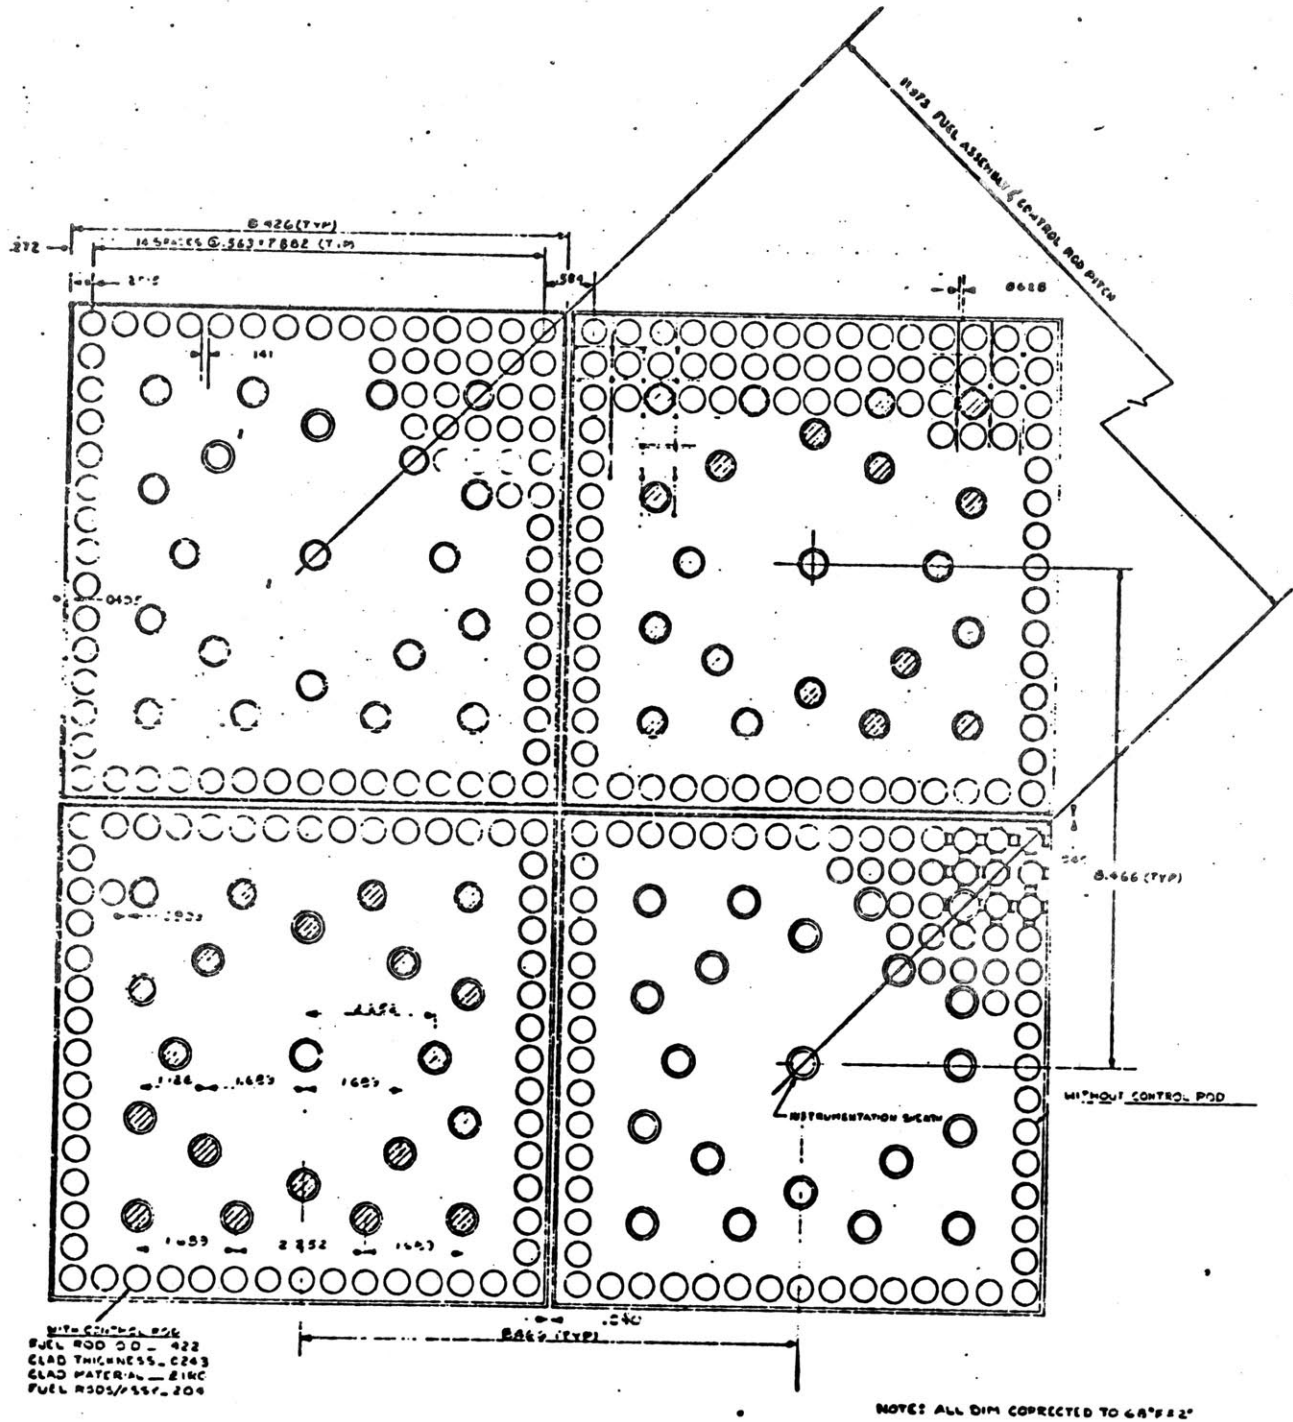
,FUEL ASSEMBLIES WITH CONTROL CLUSTER RODS IN LARGE PWR'S
